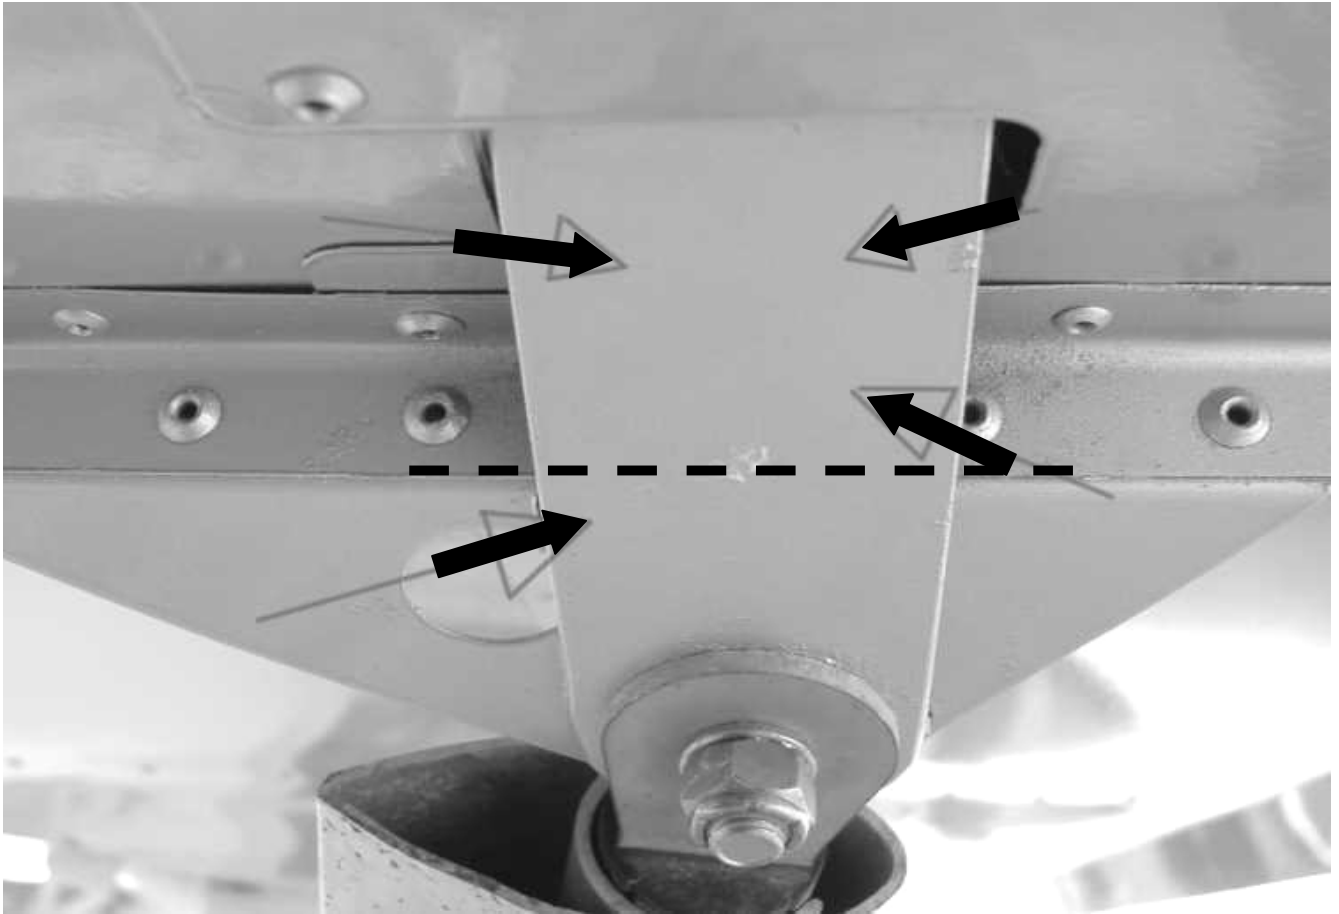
The four arrows here point out the underside of the lift strut attachment plate; the topside should also be inspected. Pay particular attention to the topside of the plate in the area marked by the dashed line and ensure that no fretting has taken place between the plate and the adjacent angle.
